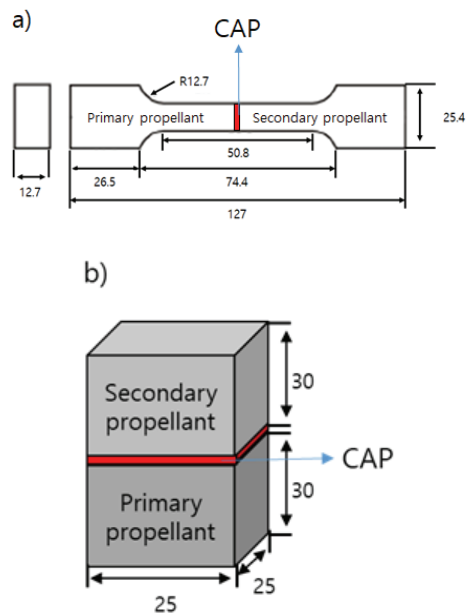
Specimen of a)JANNAF and b) Cubic (unit : mm).
